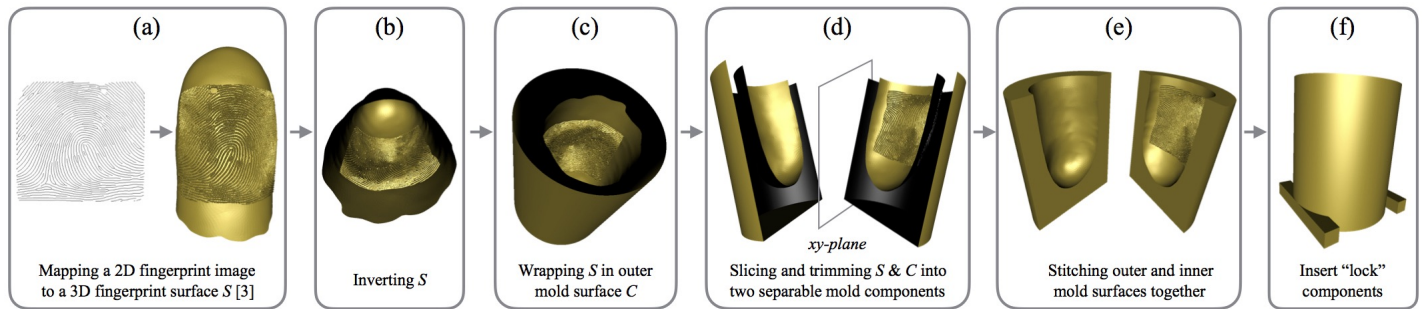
Process flow for fabricating electronic 3D fingerprint mold, M
